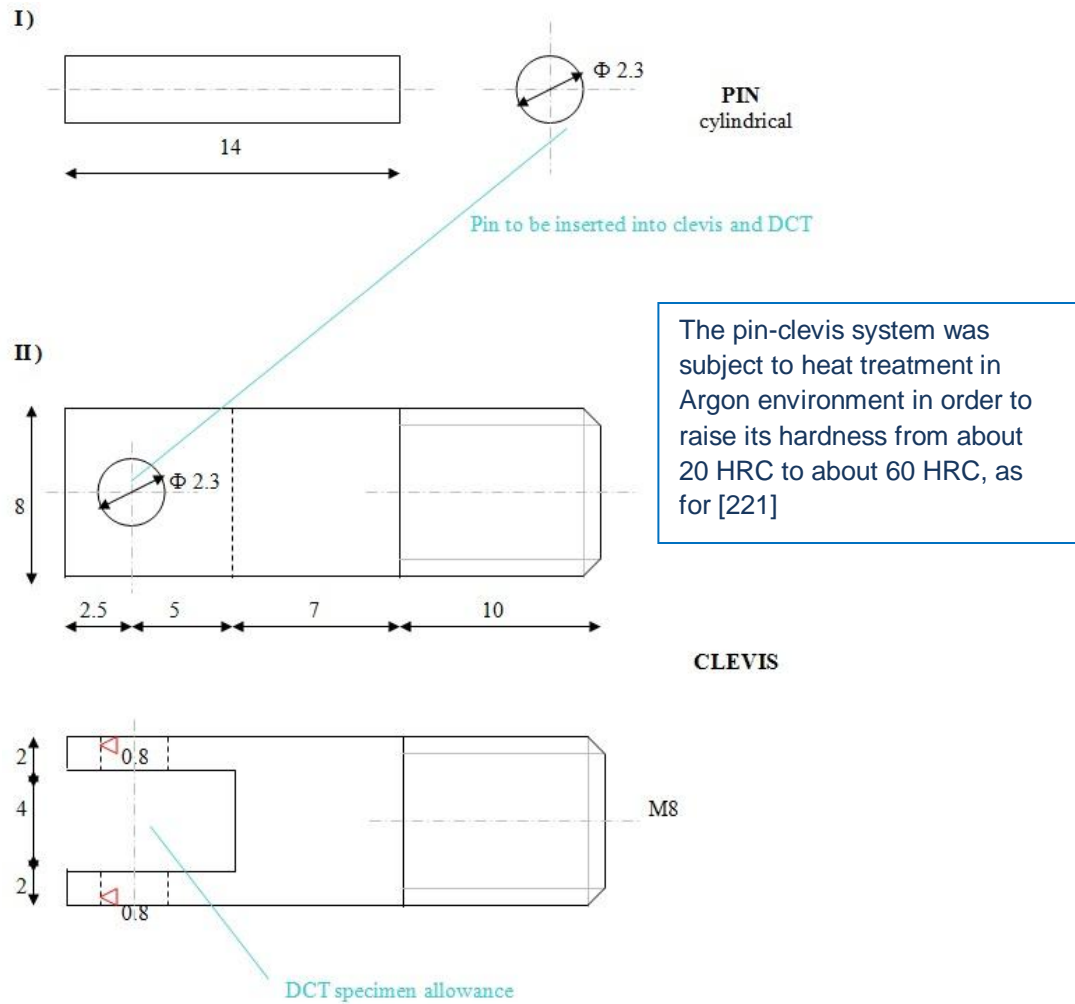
Pin-clevis system for testing disk compact specimen.
